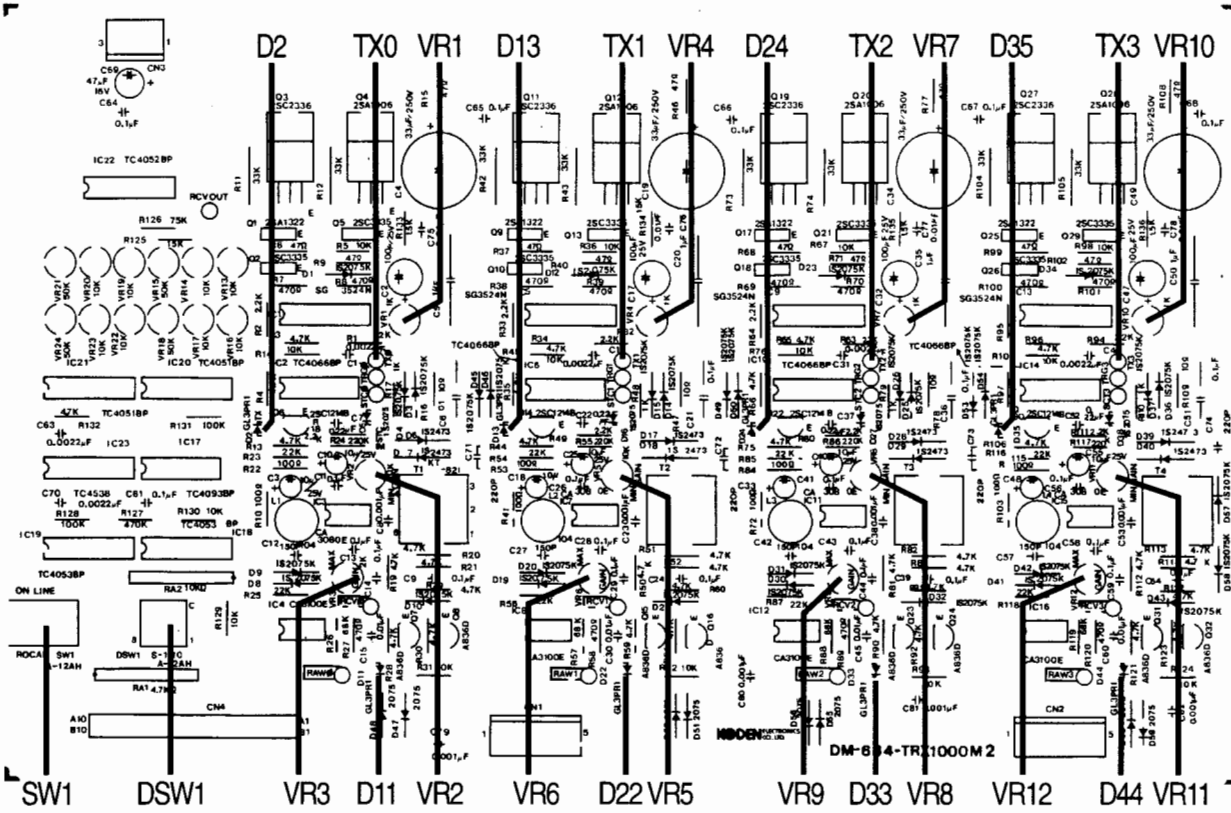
Adjustment portions on PCB DM-684-TRX1000
